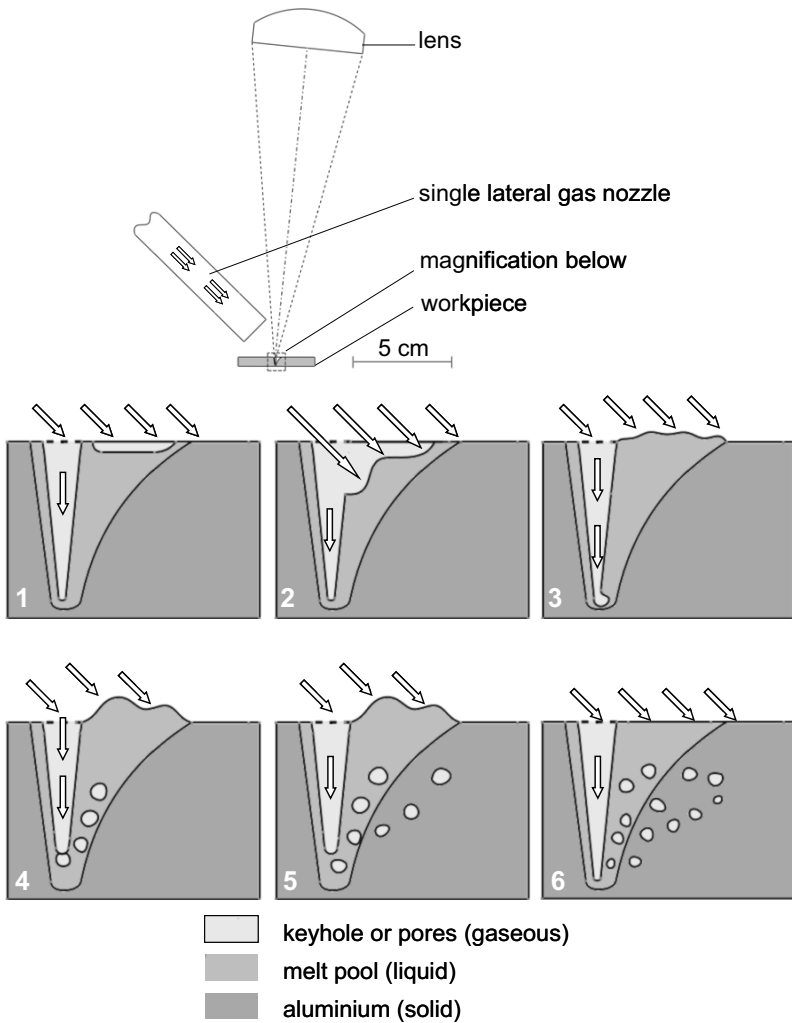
Top: setup of workpiece for a single lateral nozzle, all dimensions to scale; explicit rendition of gas nozzle, gas flow indicated by white arrows; bottom: schematic representation of process gas pores formation in single spot Nd:YAG laser welding
